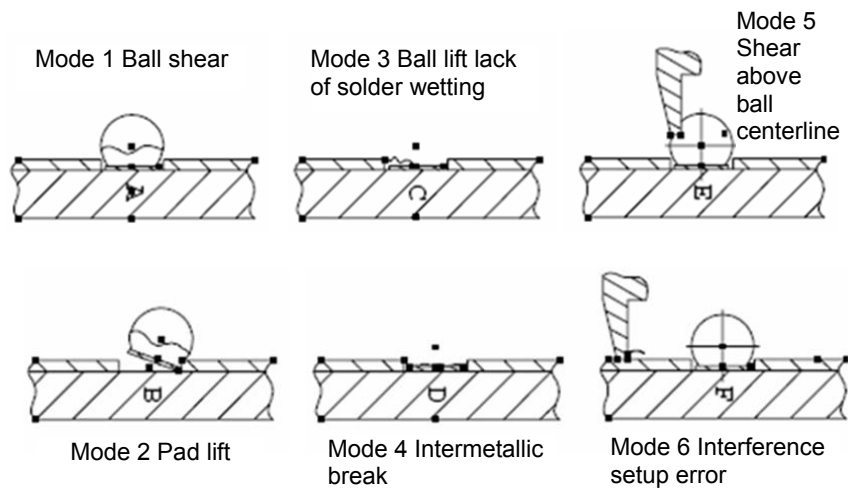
Shear failure modes of a BGA solder ball (Fig 2A-2F of JESD22-B117)
